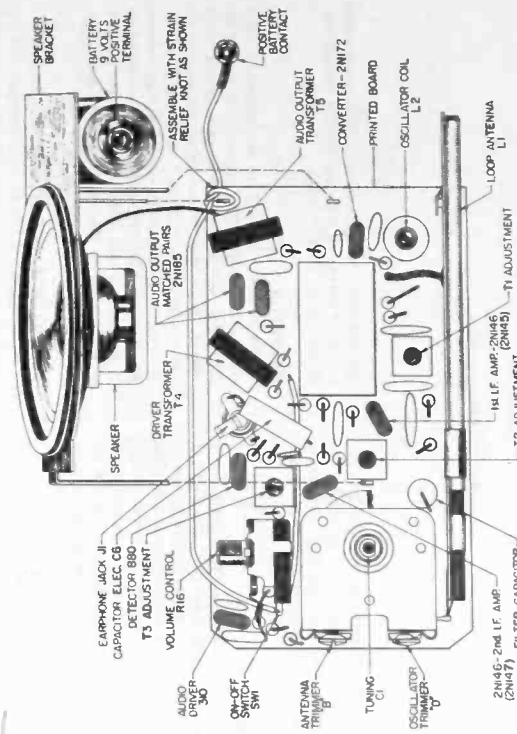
Top View Parts Layout with Speaker Raised from Board
